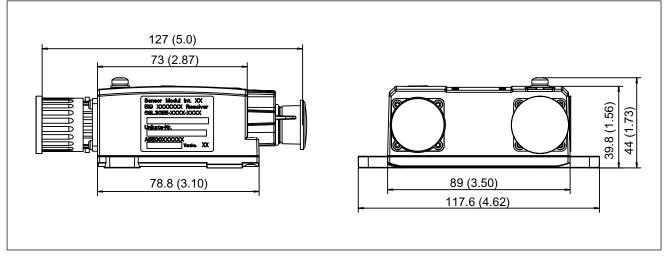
Dimension drawing SME125, Order number 6SL3055-0AA00-5KA0
